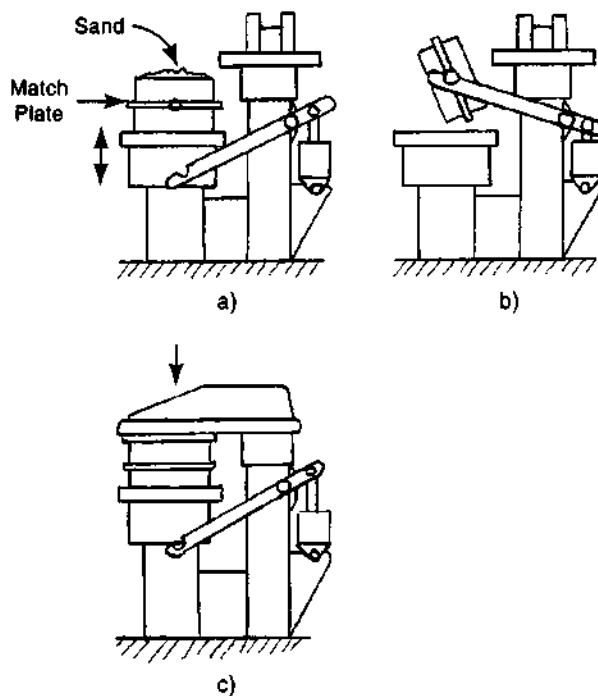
B5e1 A typical jolt-squeeze-rollover machine with a match plate pattern. a) The sand in one mold half is jolted by rapid up and down motions of the machine table to compact it around the pattern. b) Rollover - The mold is inverted after the drag is completed so that the cope half can be filled. c) The head of the machine indexes over the mold and the squeezing cycle takes place to fully compact the sand.
